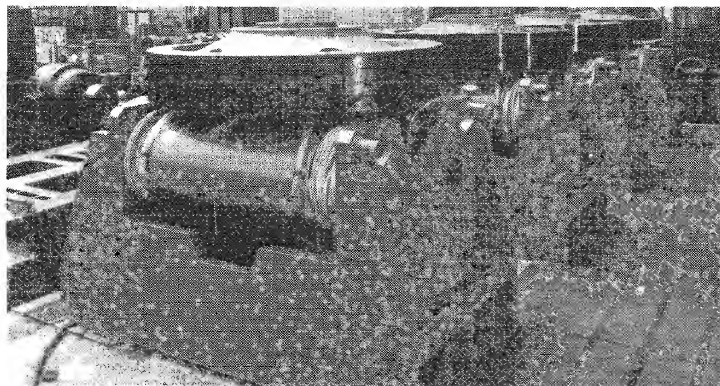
Thrust roller (KHD Humboldt Wedag AG, Cologne)
